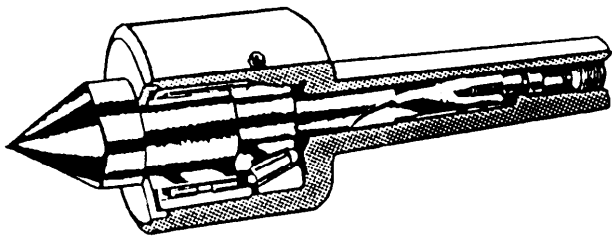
Cutaway showing the construction of a ball bearing center.
